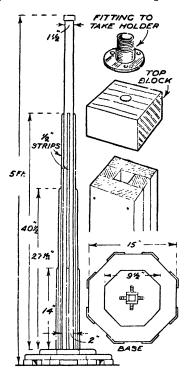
Standard Lamp. The buttressed sides are ebonised.
